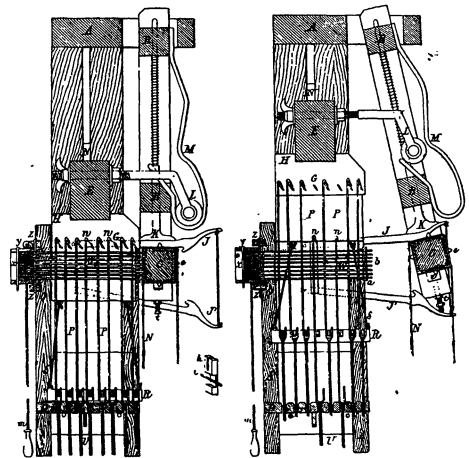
SECTIONS OF JACQUARD MACHINE.
